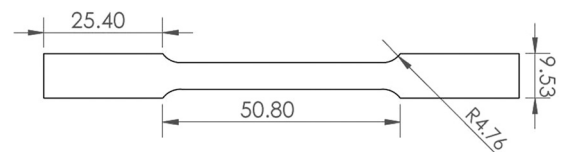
Test specimen geometry for tensile testing (dimensions are in millimeters), with 0.065 in. (1.651 mm) thickness
